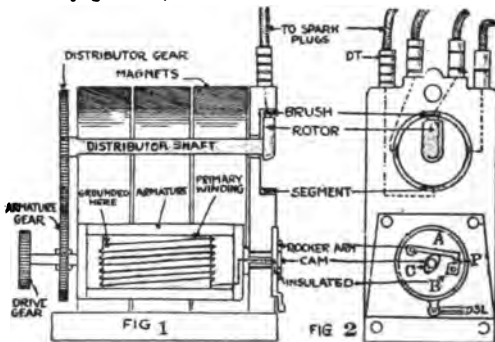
Note how distributor shaft is driven by gear on armature. Fig. 2—Front view of distributor and interrupter.
